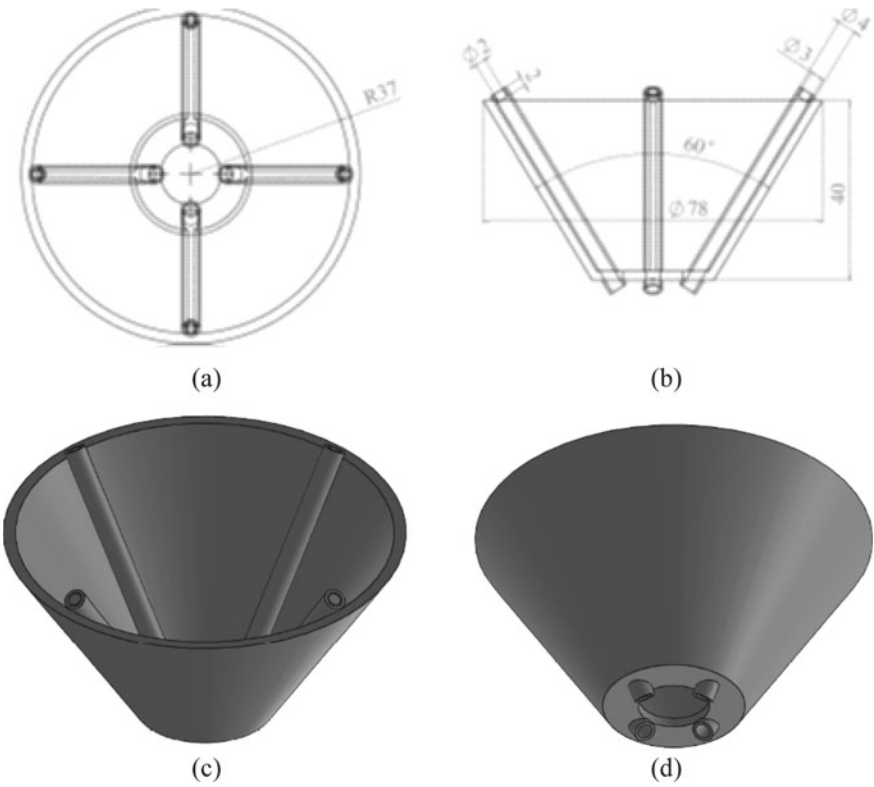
Laser head with nozzle. a Top view. b Front view. c-d 3D view
